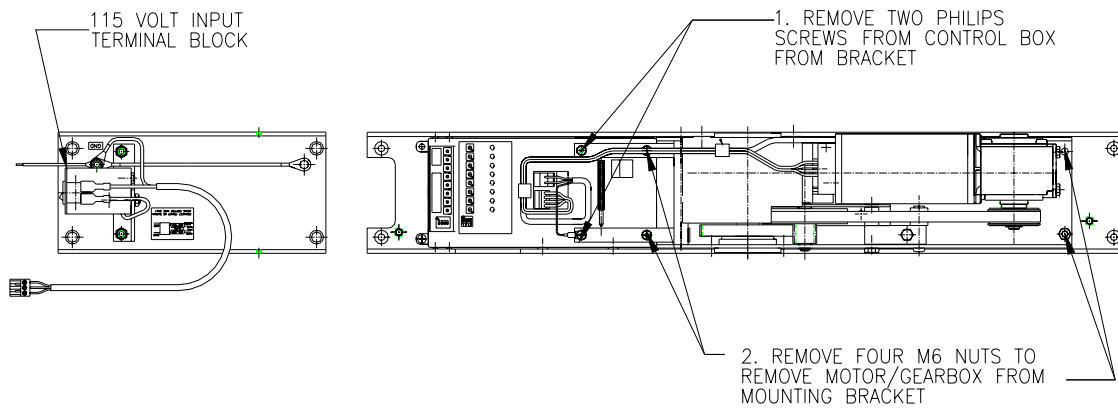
MOTOR/GEARBOX & CONTROL BOX REMOVAL
